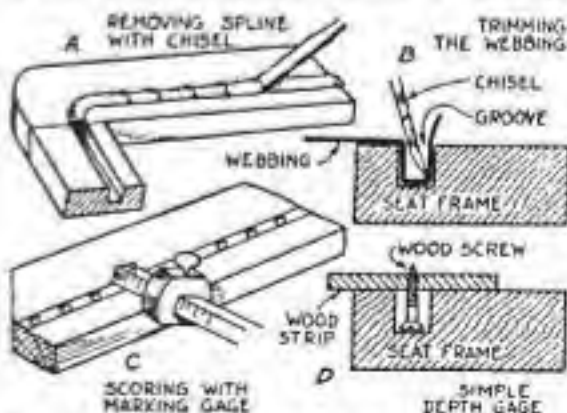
Steps to removing a spline, cutting the case, and marking and testing a groove.
